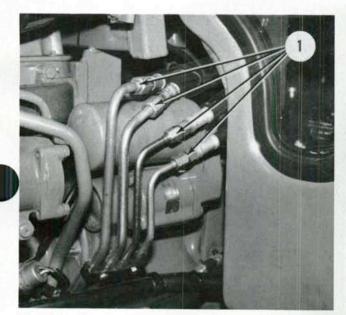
Tag the four power steering lines (1) before disconnecting to ensure proper reassembly.
